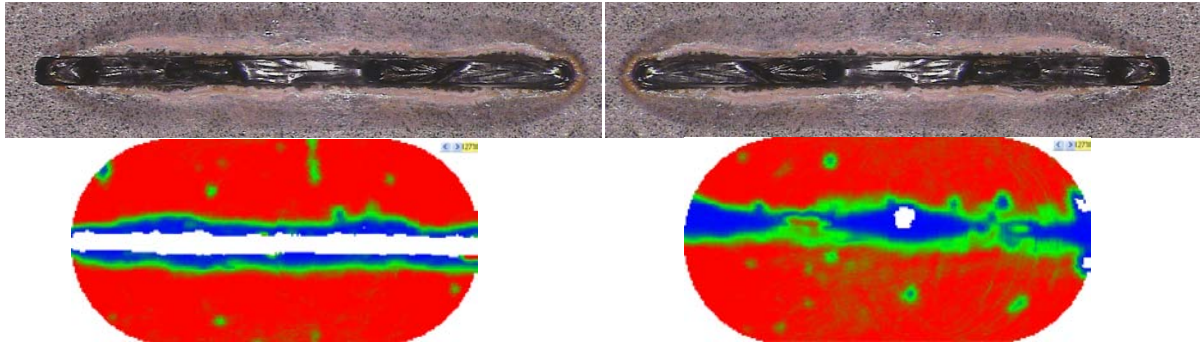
Weld top bead (0.4mm gap, sample B) and Amstech result from top bead (L) and bottom bead (R)
